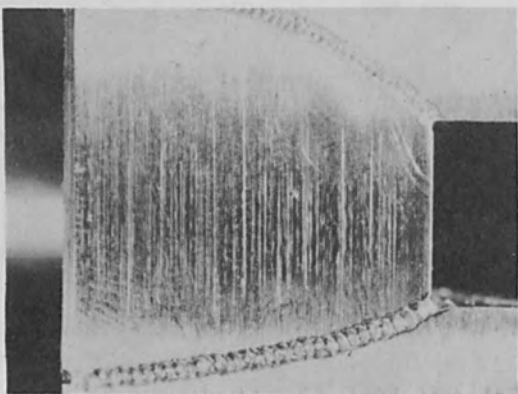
Oil-hardened tool steel cylindrical staking tool repair.
